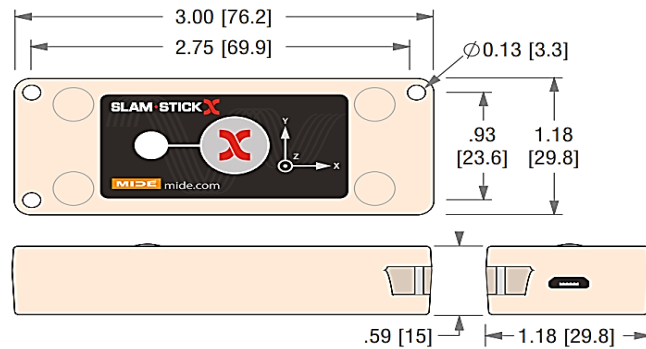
Accelerometer with its dimensions (<https://www.mouser.com>, 05.02.2021.)
